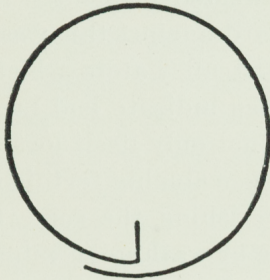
Section of small Galvanised Sheet Iron Pipe.
